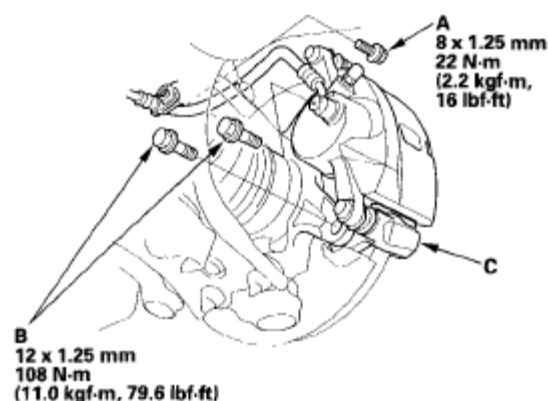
Identifying Brake Hose Mounting Bolt (With Torque Specifications)
